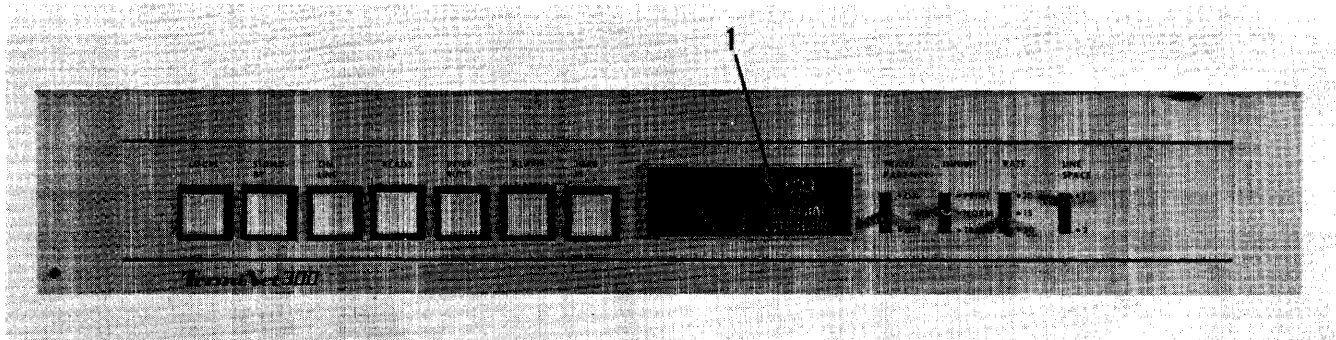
Control Panel Assembly (Front View), TermiNet 300 C Printer
